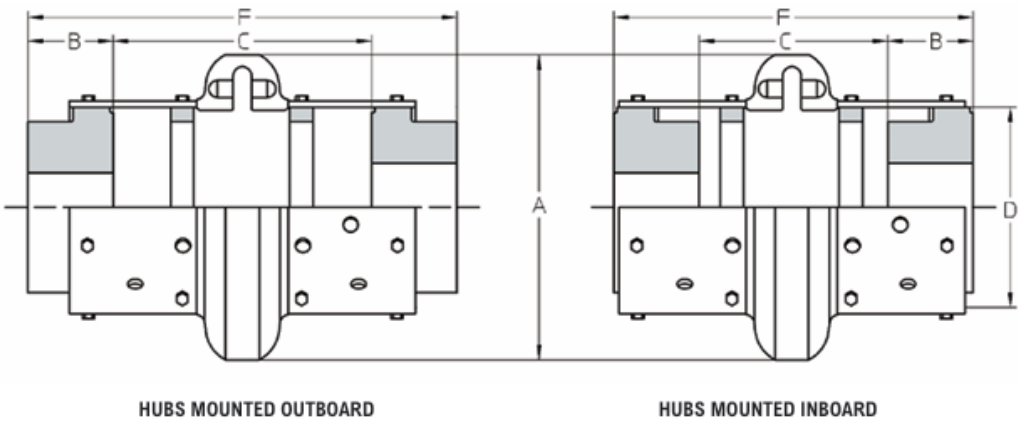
Structural engineering blueprint cross-section of the OMEGA™ close-coupled configuration equipped with compression bushed hubs.
